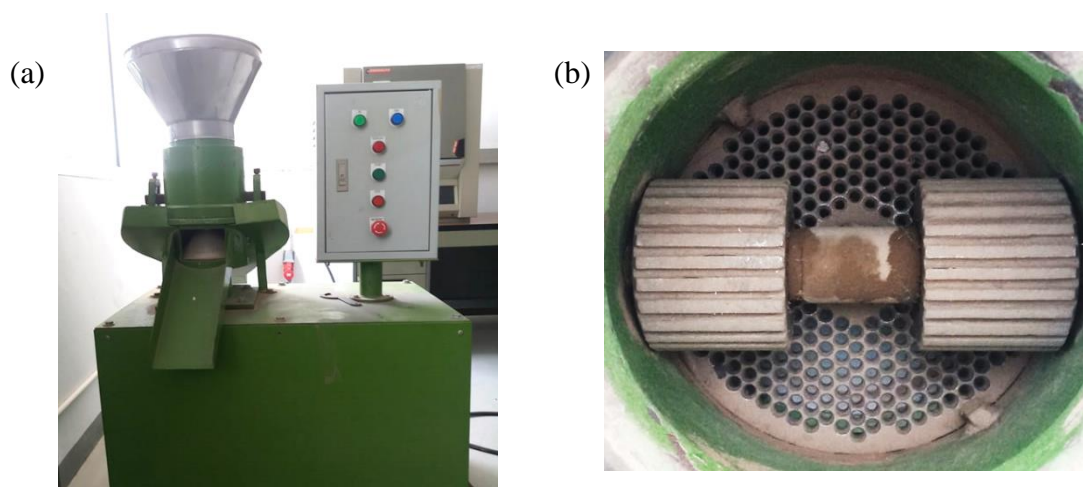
(a) Pellet mill, (b) roller and pellet die blocks.
